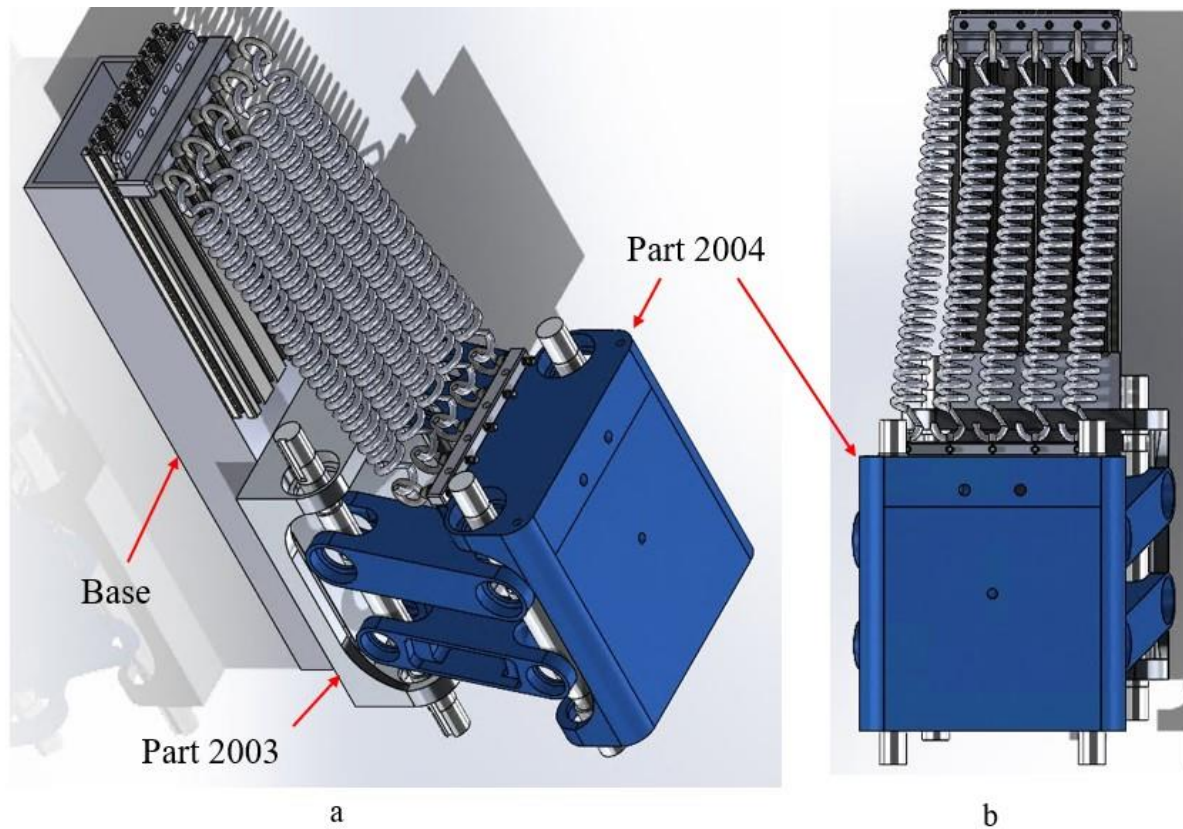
Spring attachment system design. (a) An isometric view of the design. (b) A front view of the design. The spring attachment system connects the base of BLUE SABINO with part 2004. The design includes five identical springs. These springs are intentionally close together to reduce the profile of the spring attachment system. Hardware components have been excluded from this image.
